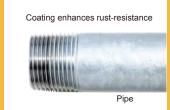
Thread is left with a layer of pipe coating (20-30 µm).
